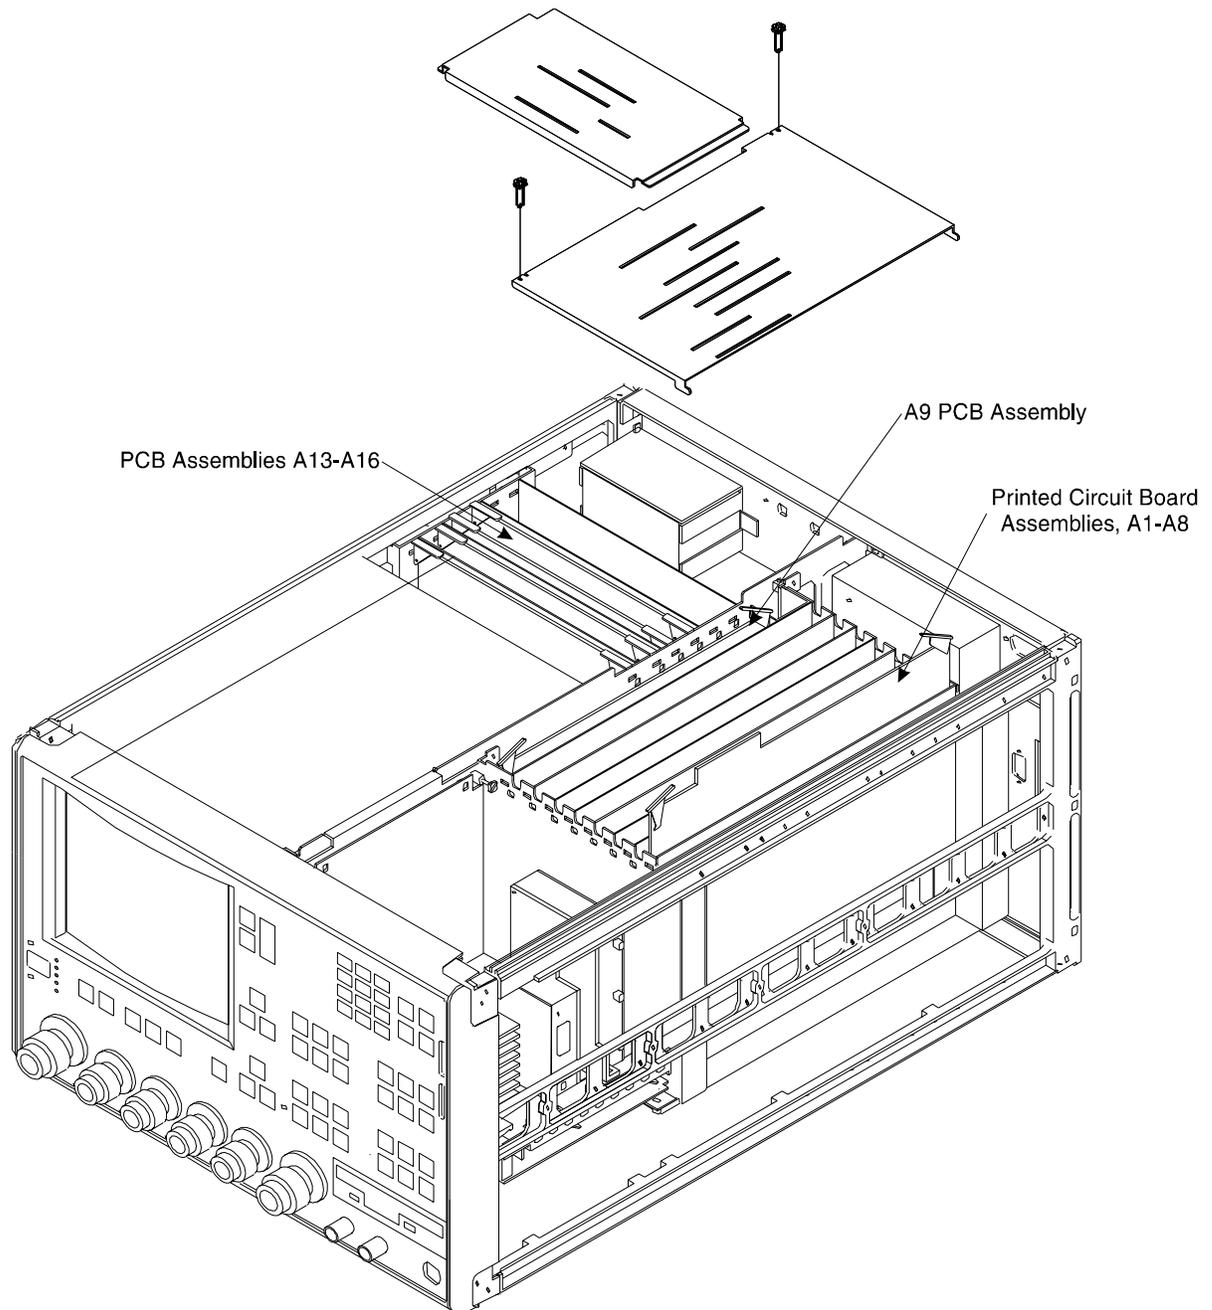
A1-A9 and A13-A16 PCB Assemblies Removal Diagram
